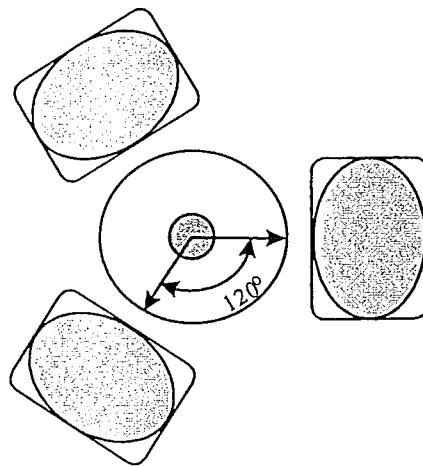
Schematic drawing of the welding torch and electromagnetic coils (top view).
